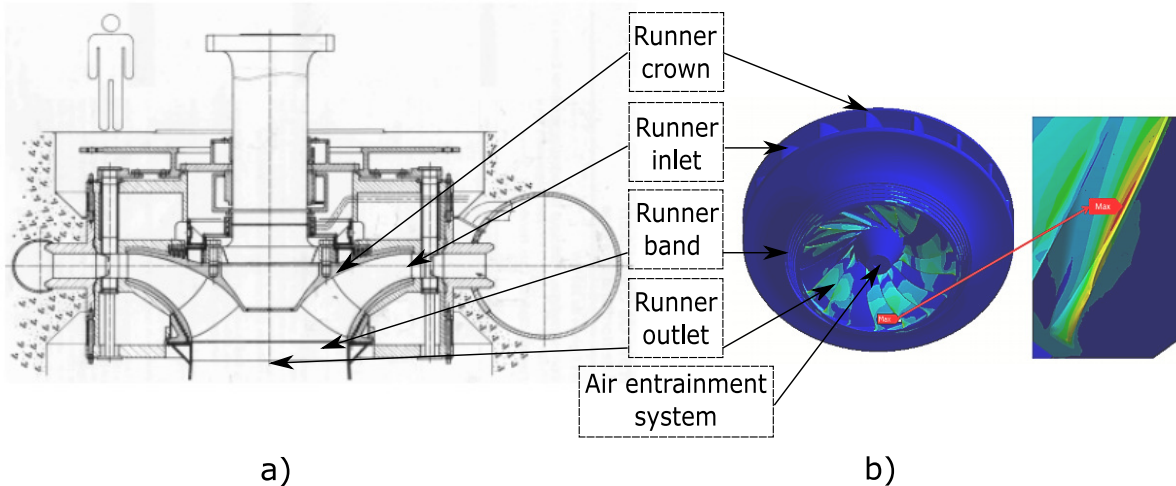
a) Axial view of high head Francis turbine. Taken from [3]. b) 3D model of runner with RSI loads. Taken from [22]
